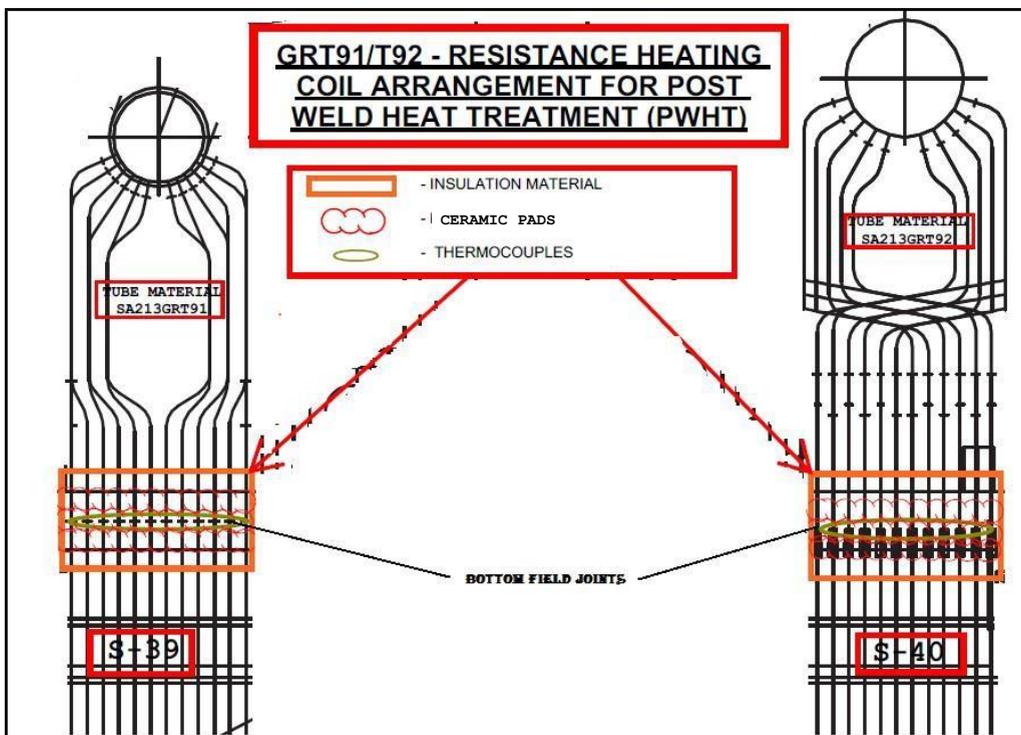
Resistance heating Coil arrangement for PWHT of T91/T92 tube assembly
